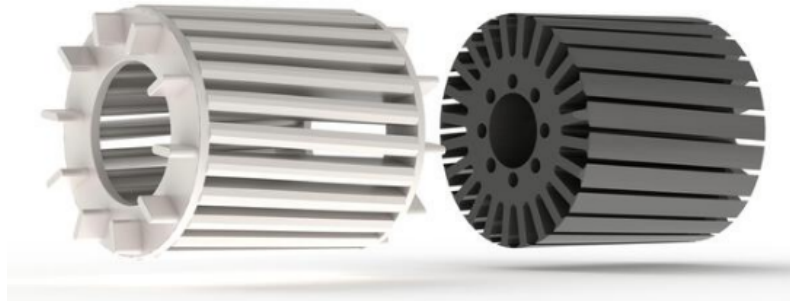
Rotor's Exploded View (Cage and Core) [26]
